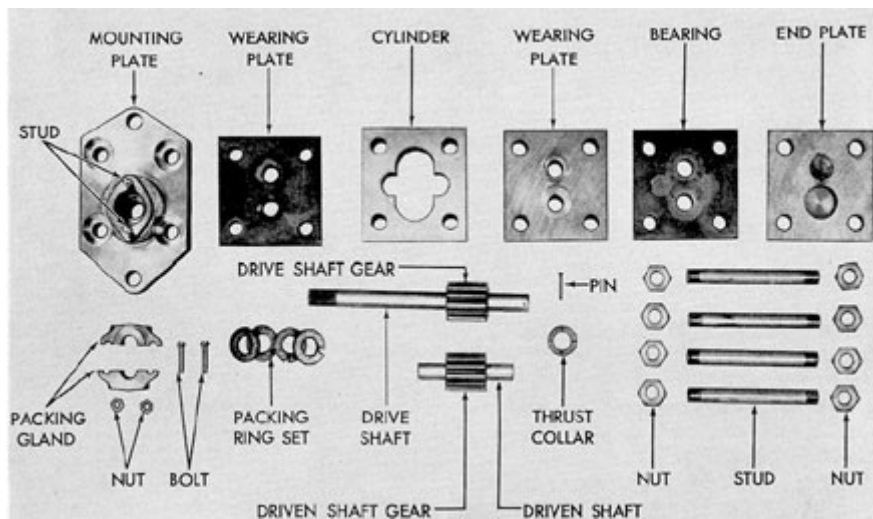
Exploded view of attached fuel oil supply pump, GM.
